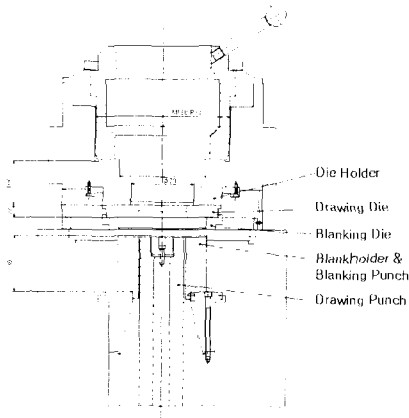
Sectional view of assembled die parts in universal sheet metal testing machine
